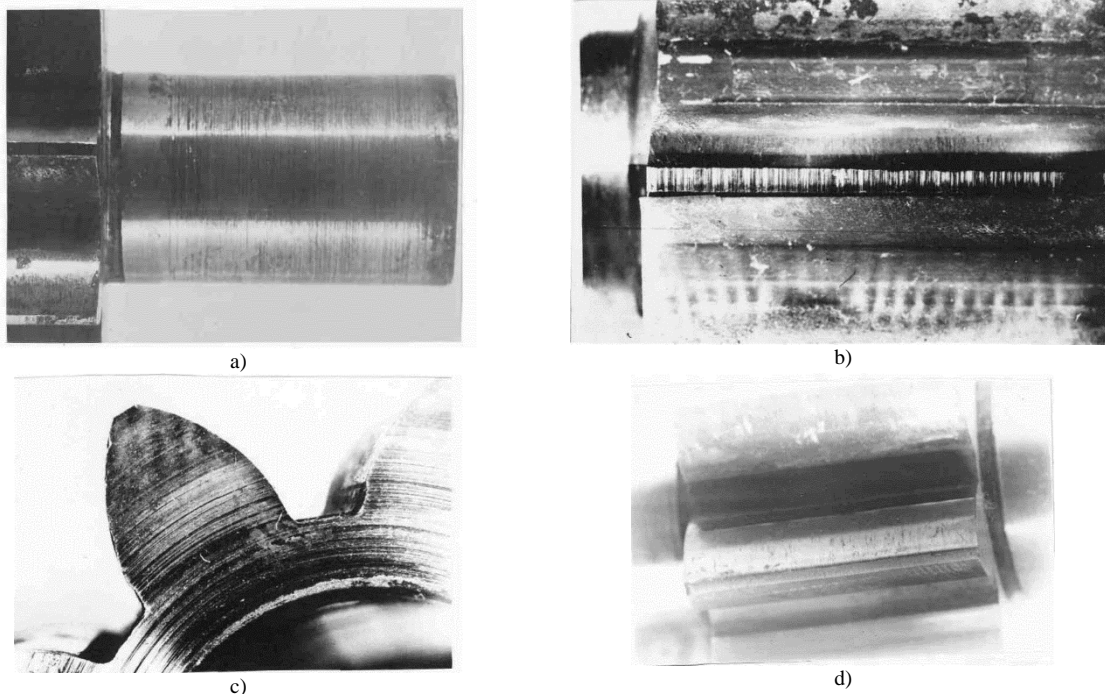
Traces of abrasive wear on the surfaces of the gear trunnion (a), gear tooth tip (b), gear face (c), and mechanical abrasion of the tooth head (d)
